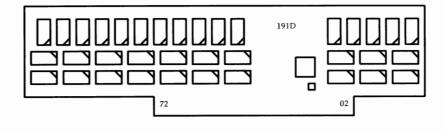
CM191C 1-Megabyte, Surface Mounted, RAM Card Layout
